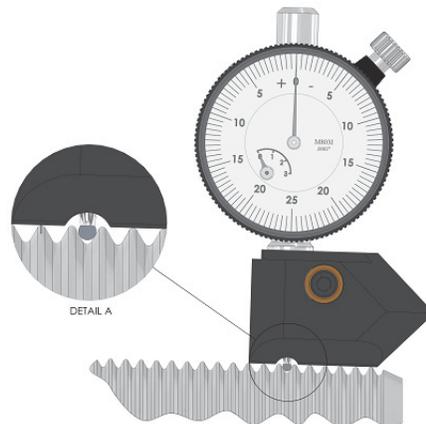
External Addendum Gauge on Pin Threads (Round Thread Addendum Gauge)
